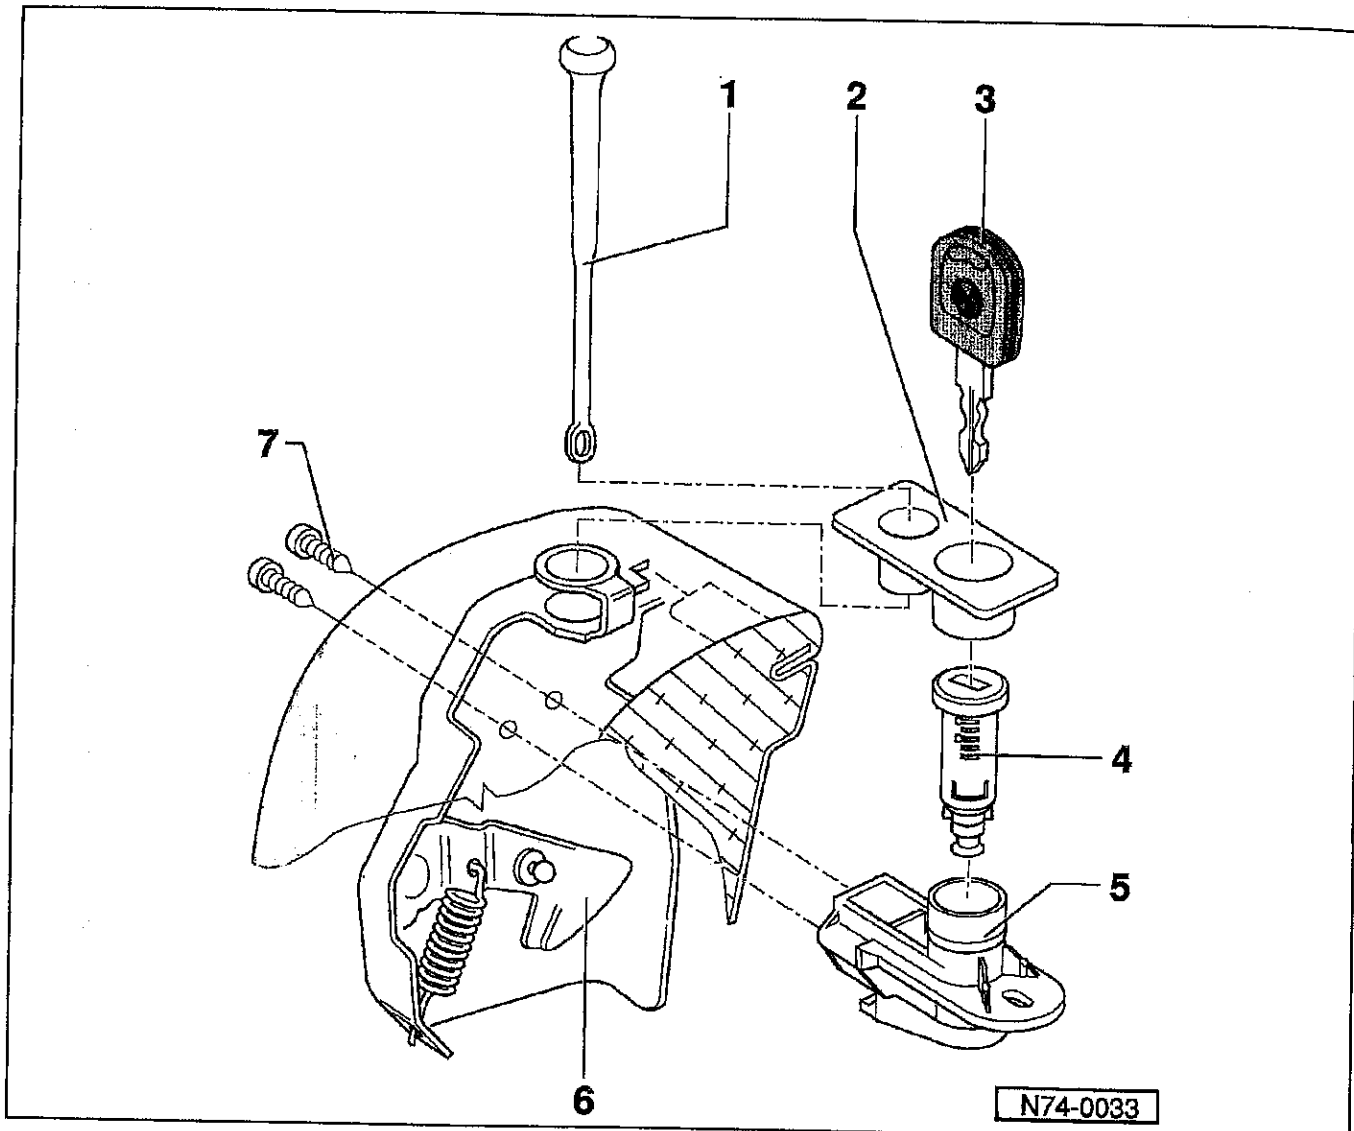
Exploded view of rear seat back lock for Jetta models.
